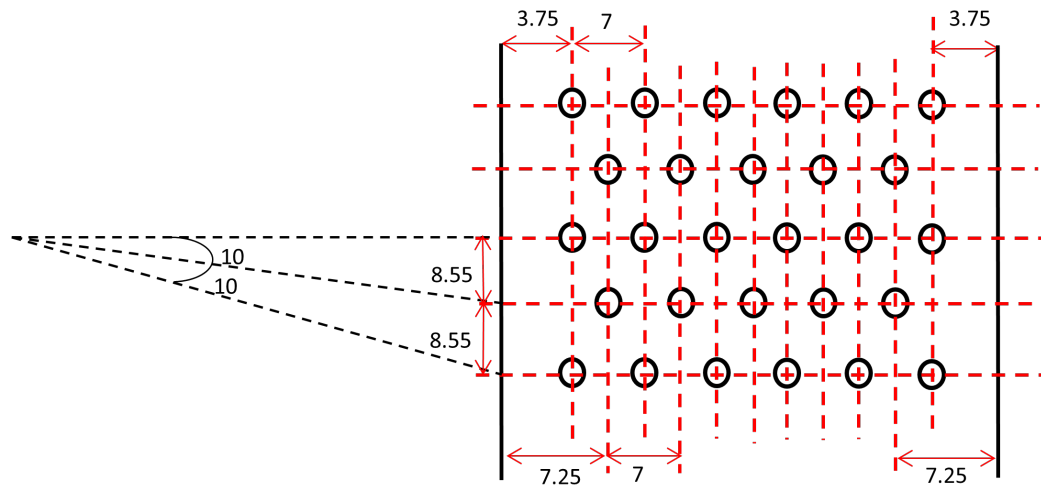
The dimple arrangement on the journal surface. All dimensions are in millimeters (mm)
